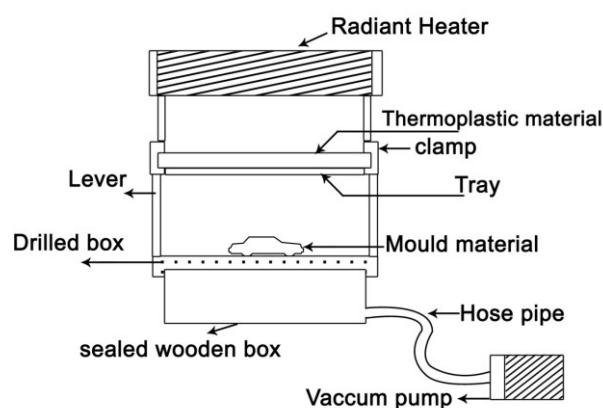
CAD Diagram of Vacuum Forming Machine
